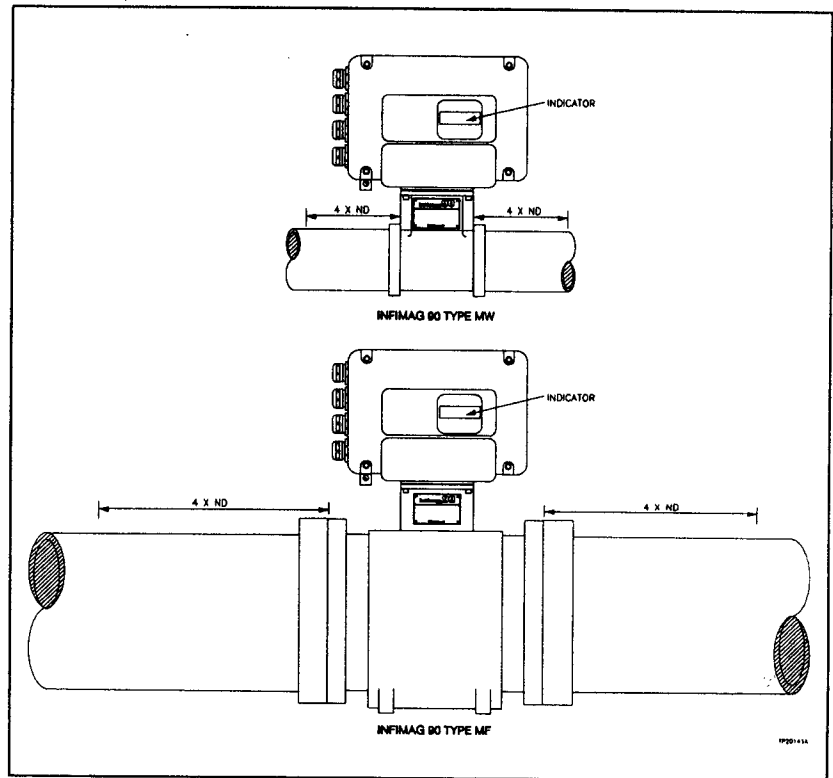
Flowmeter Installation with Straight Pipe Sections
